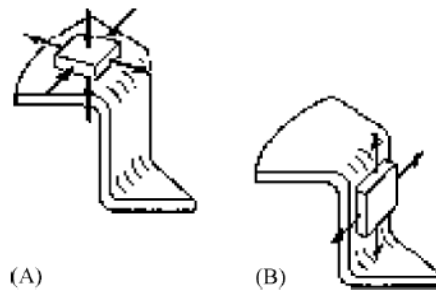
Workpiece stresses during deep drawing (Colgan & Monaghan, 2003)
